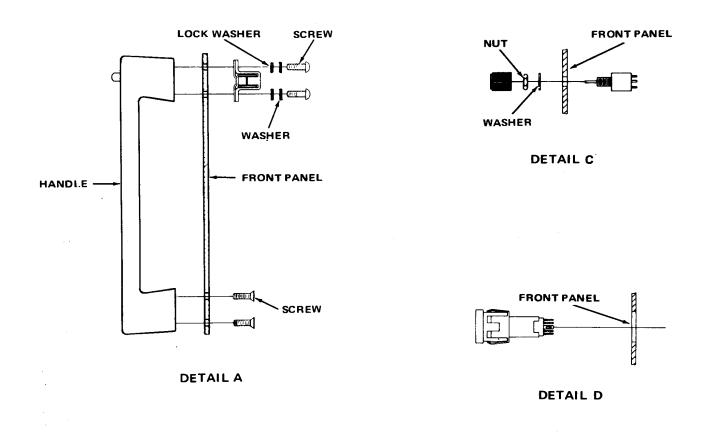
VOR Local Control Front Panel and Chassis-Mounted Parts Location Diagram (Sheet 2 of 4)
